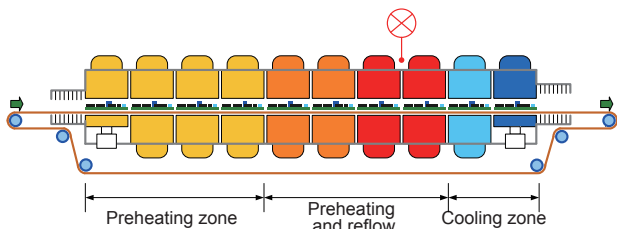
Oxygen Measurement in Reflow Furnace in Soldering Equipment
